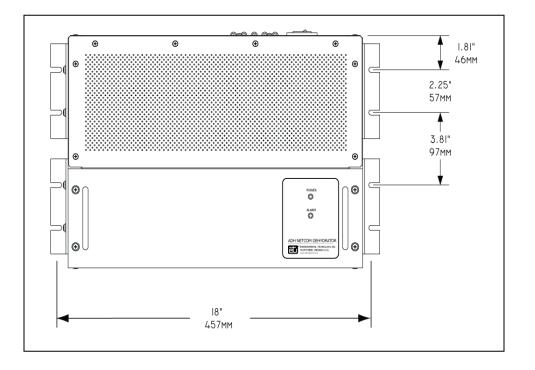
WALL MOUNT BRACKET HOLE DIMENSIONS.
